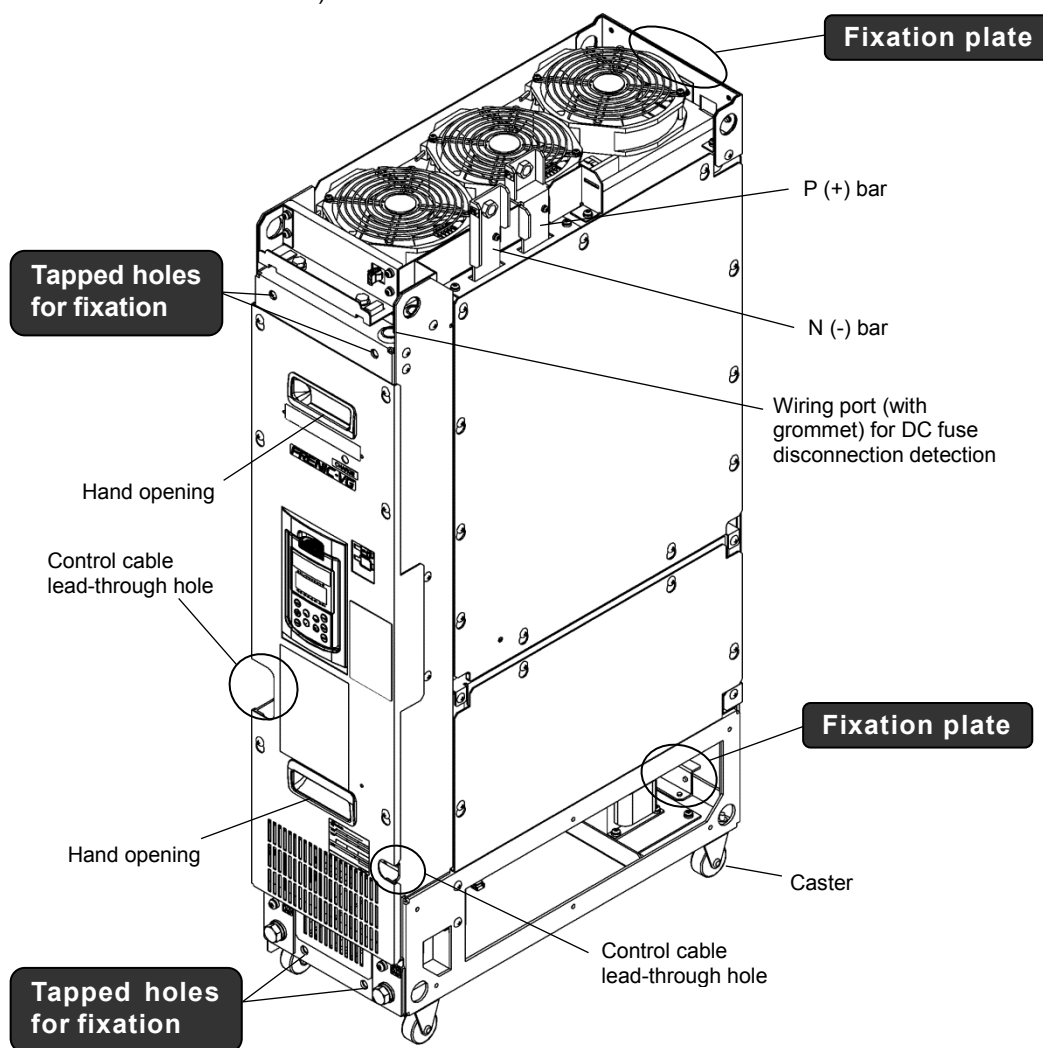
Fixation points for Frame 3 size (400V/690V: 132 to 200 kW)
